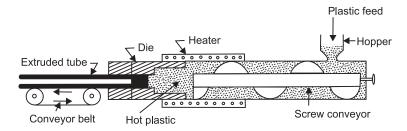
Moulding of Tube by Horizontal Extrusion Moulding
